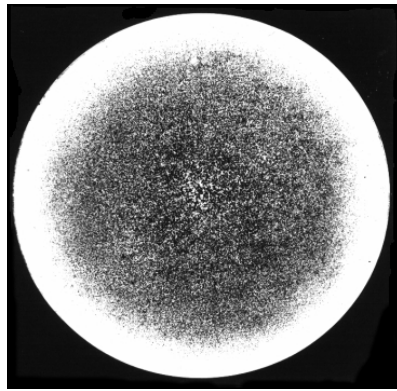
Macrostructure of chilled cast iron forming roll body with diameter 431 mm
